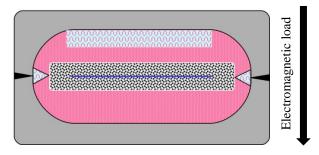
Assembled conductor for the first TF coil layer. The superconducting cable located in the conductor center is surrounded by mixed matrix Cu/CuNi profile with two triangular and one rectangular cooling channels. The whole assembly is surrounded by a steel jacked, longitudinally welded near the triangular cooling channels (longitudinal welds are indicated by flat dark triangles).
